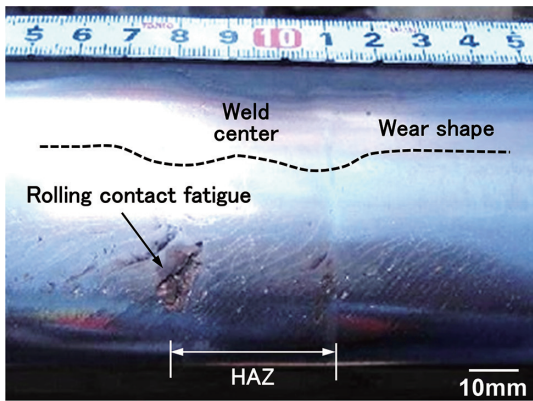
Example of wear and rolling contact fatigue that occurred at FB welds²⁾
